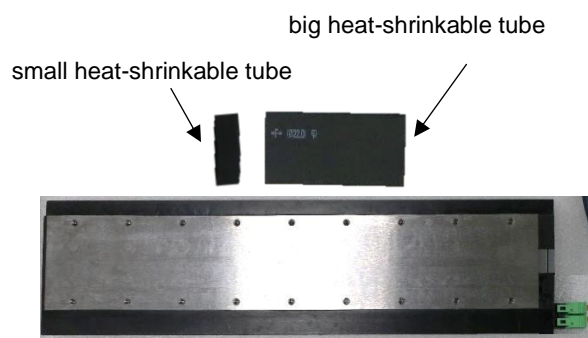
Motor, heat-shrinkable tube
